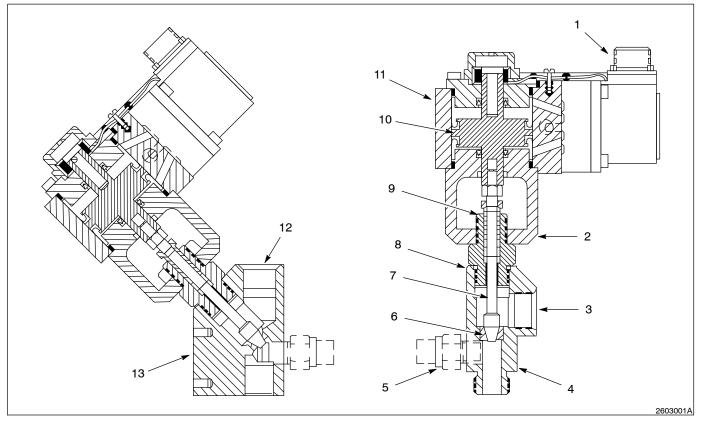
Extrude and co-extrude Hi-Flo dispensing guns
